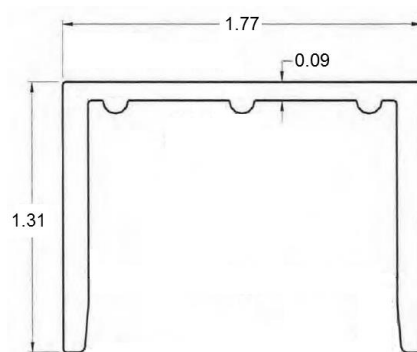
Kingston Aluminum Insert for Top and Bottom Rails
